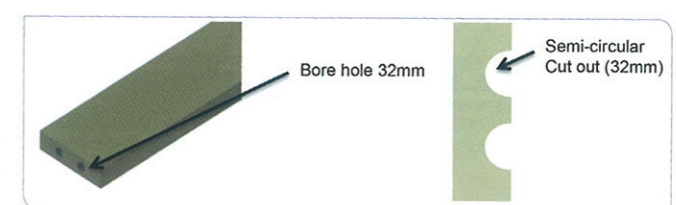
Foam core; right: section view of a segment; left: assembled foam core with the resulting bore holes
